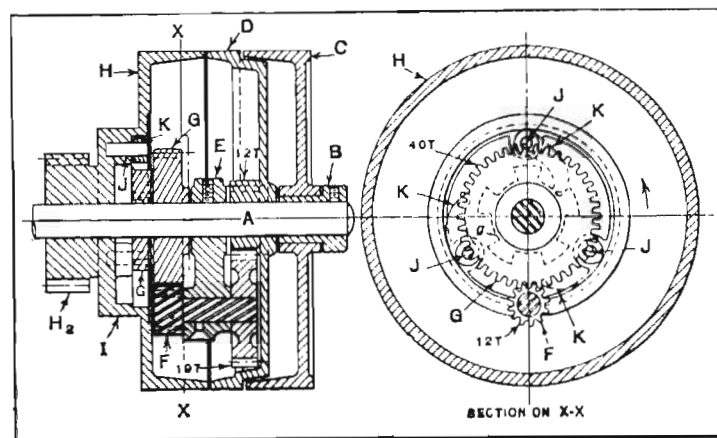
Slow Starting Motion Mechanism of Textile Machine
